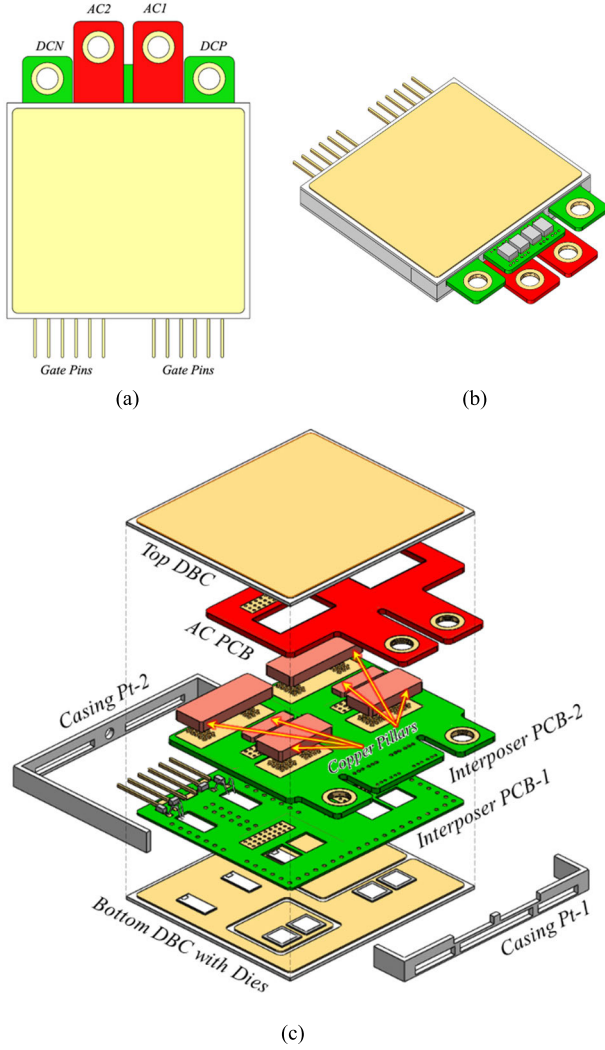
Three-dimensional model of the designed DSC module. (a) Top view. (b) Isometric view. (c) Exploded view.
